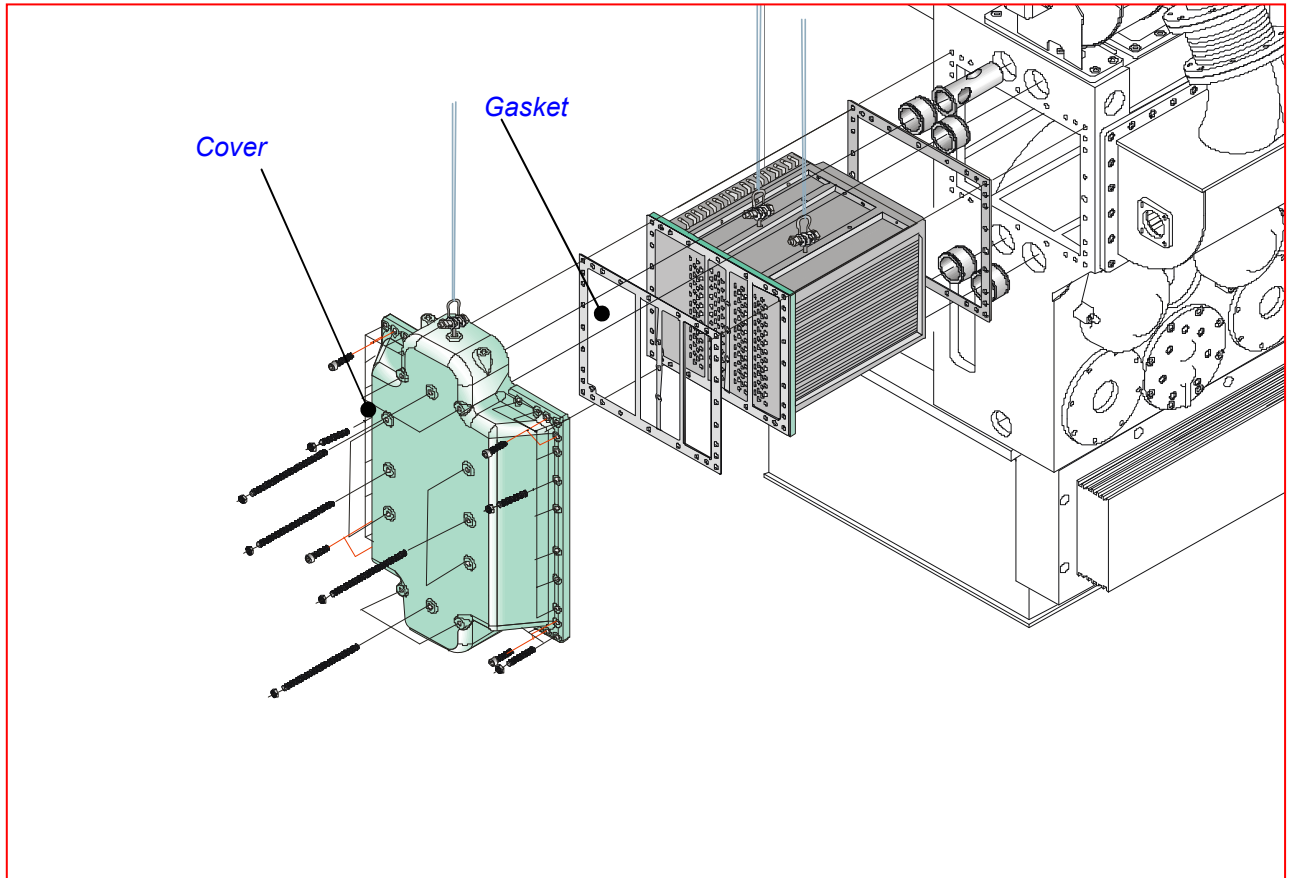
Dismantling of Charger Air Cooler (과급 냉각기의 분해)
